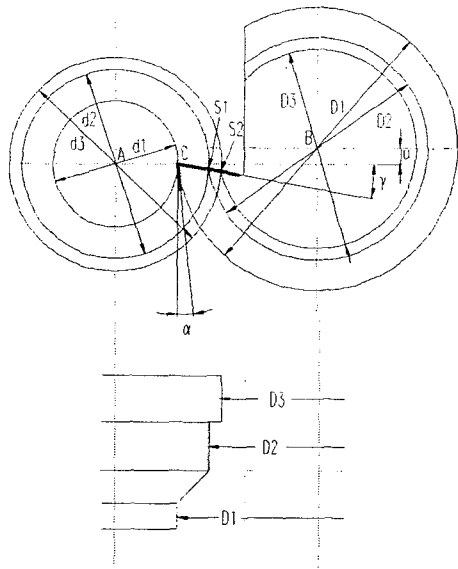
Compensation method of circular formed tool of a multi-shaft turning machine
